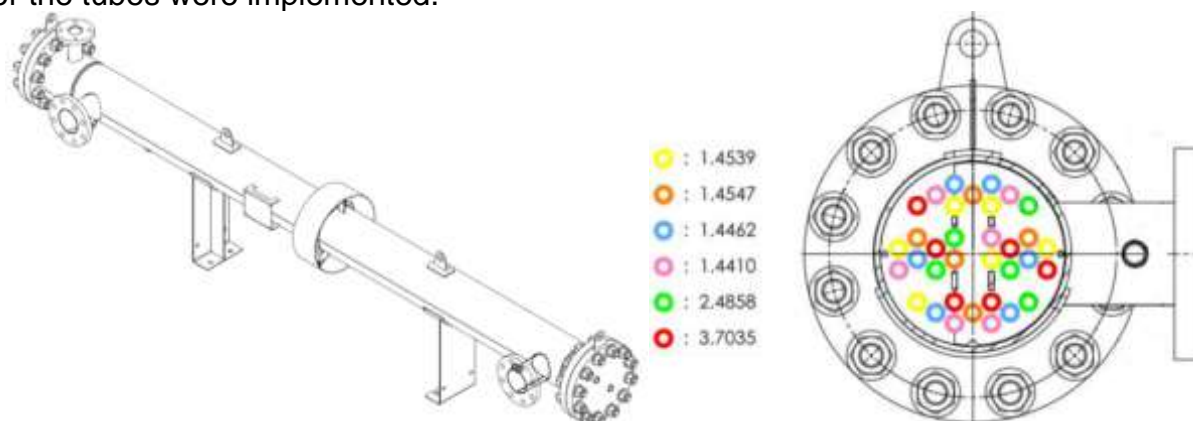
Drawings of the prototype heat exchanger (left) and of the end plate design showing the metallurgies used (right).
